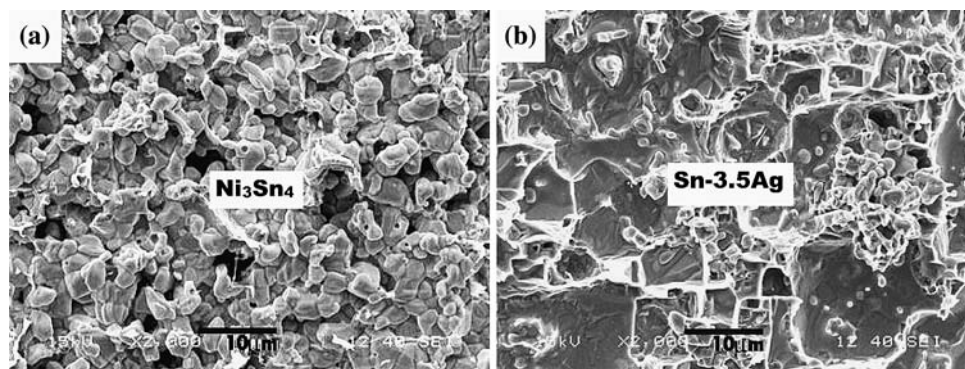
Top view of the fracture surfaces of the sample shown in Fig. 7: (a) left-hand side surface and (b) right-hand side surface.
